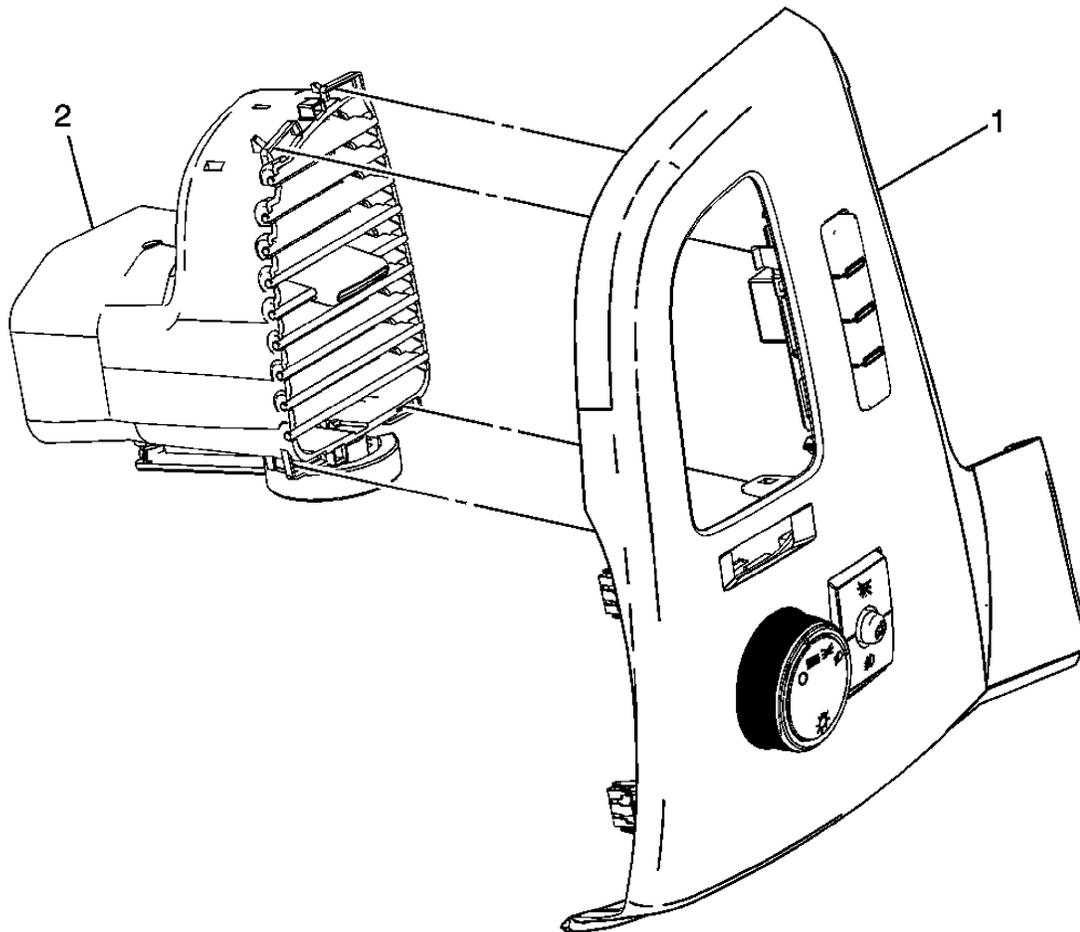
View Of Instrument Panel Trim Plate & Air Outlet Assembly
